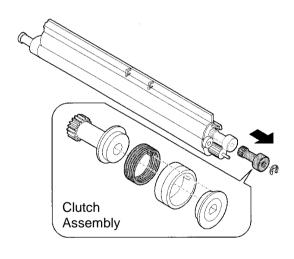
Removing the Transfer Drum Cleaner Brush Clutch
